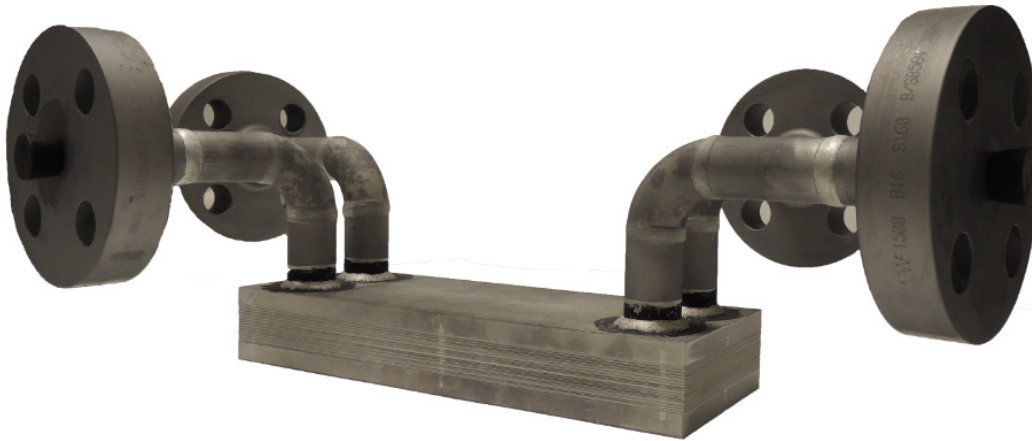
Photo of the fabricated zigzag-channel PCHE with four headers assembled.
